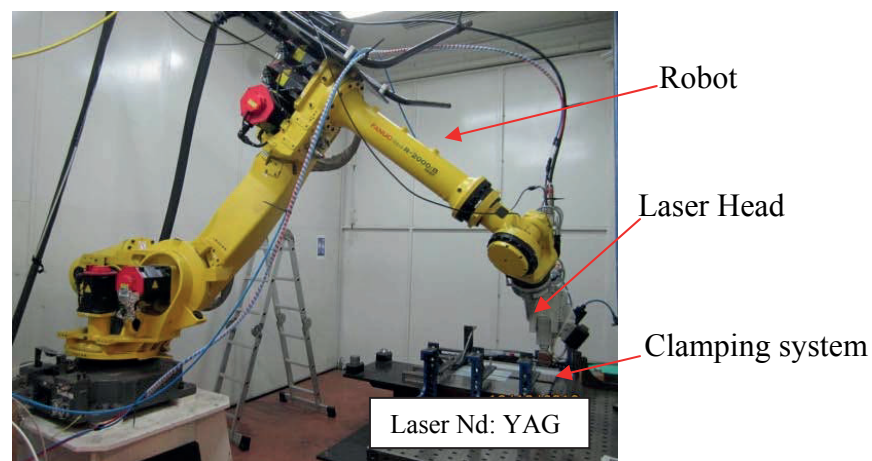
1 Sheet metal assembled with laser welding robot
